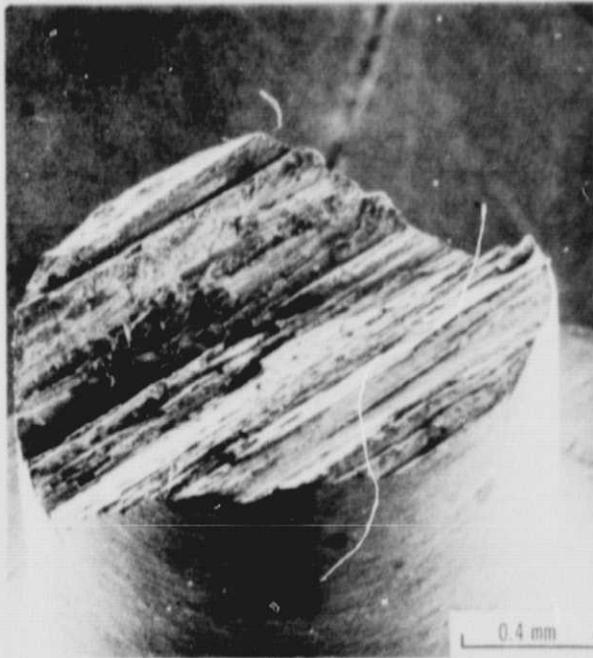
Scanning electron fractographs of 760°C transverse tensile specimen A75-180-02-3, strain to failure 0.12%.
